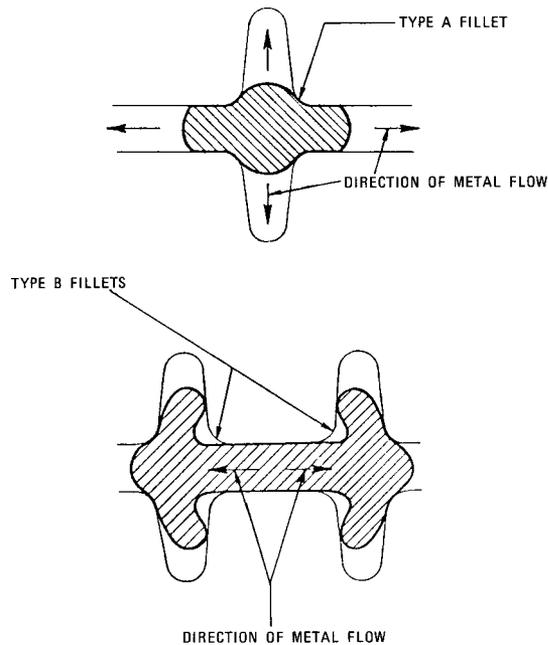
Design of Fillets for Forging (from Ref. 26).
